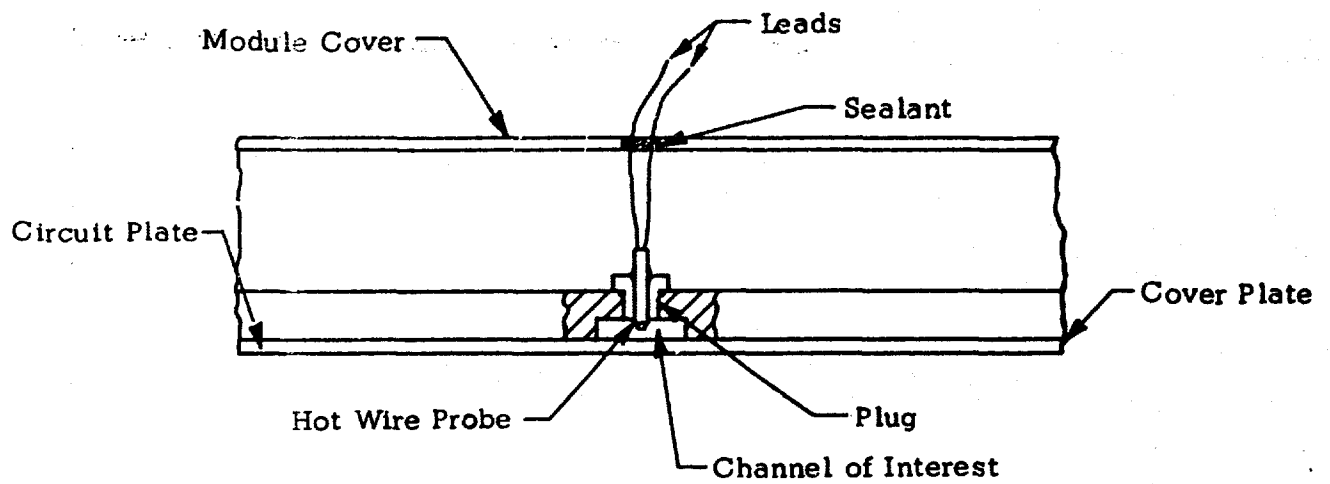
HOT WIRE MOUNTING FOR MODULAR CIRCUIT
